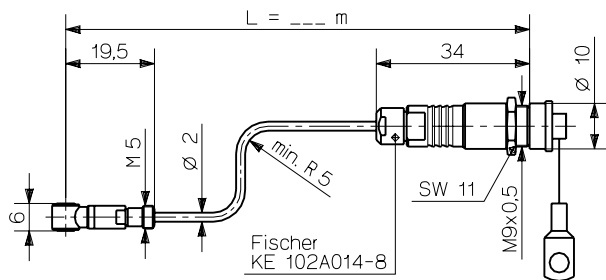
Force Sensor Type 9211B... with cable and connector
